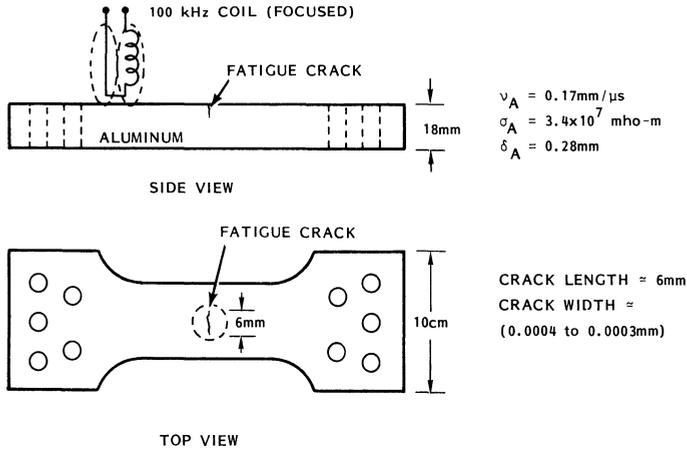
Fatigue crack geometry in aluminum.
